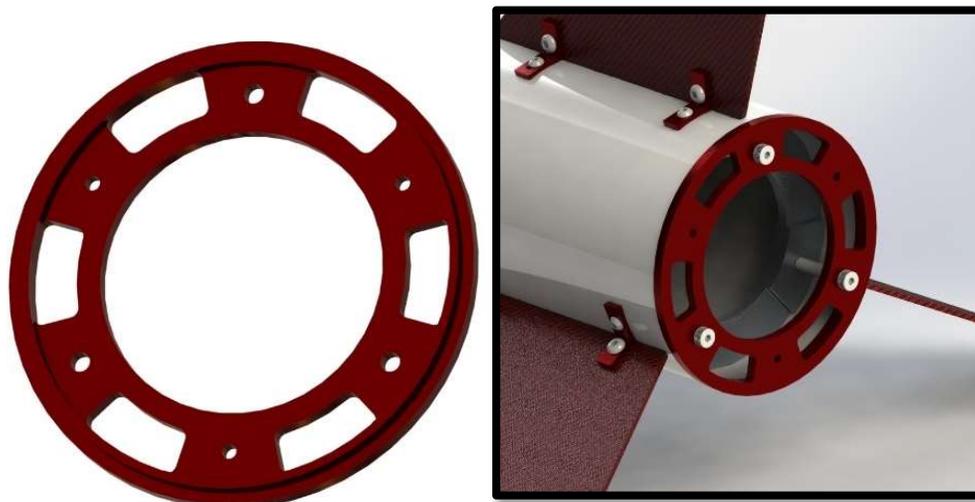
Fore/Middle (left) and Aft (right) Centering Ring Dimensional Drawings
